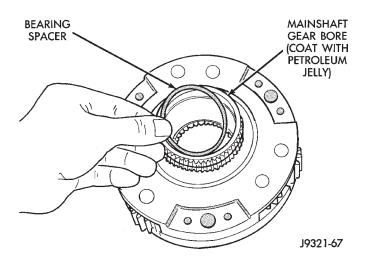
Installing Bearing Spacer In Mainshaft Gear
